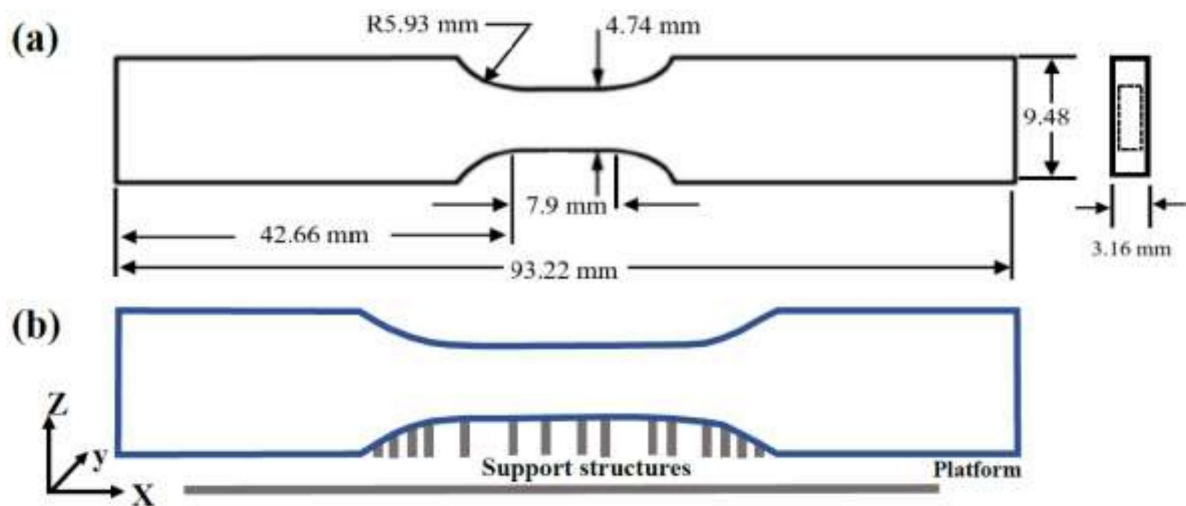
Specimens design and preparation. (a) Schematic of flat sheet fatigue specimen with rectangular cross-section; (b) orientation of the specimens during DMLS manufacturing process.
